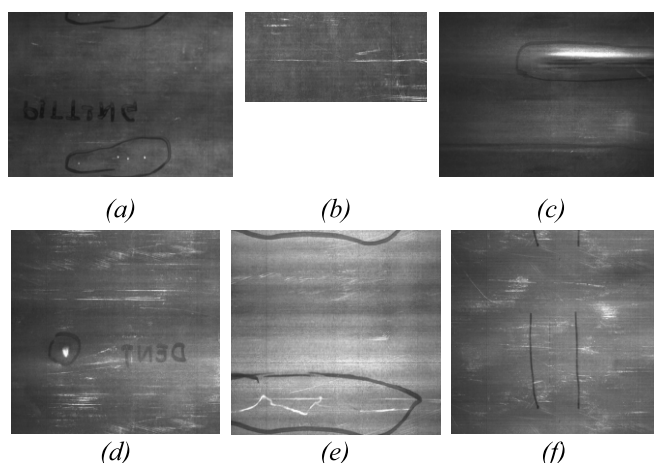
PHWR clad tube surface defects- (a) pit, (b) scratches, (c) grinding mark, (d) dent, (e) handling marks and (f) tool mark.
